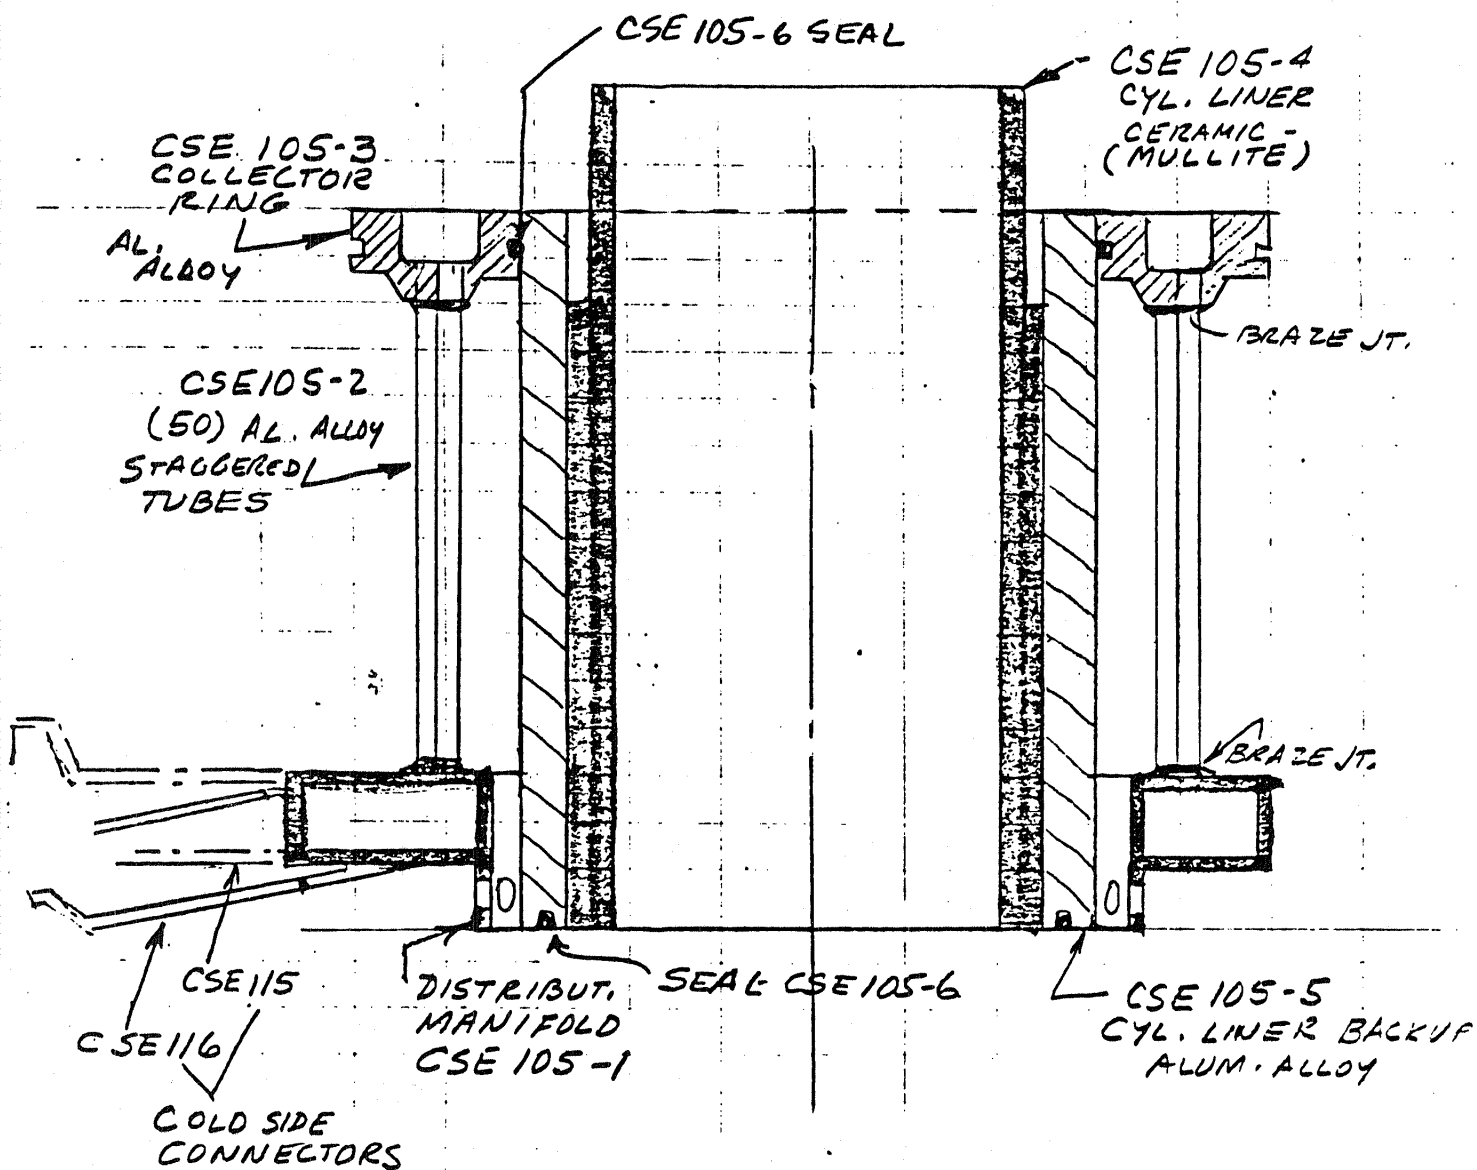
COLD SIDE COMPONENTS ASSEMBLY
